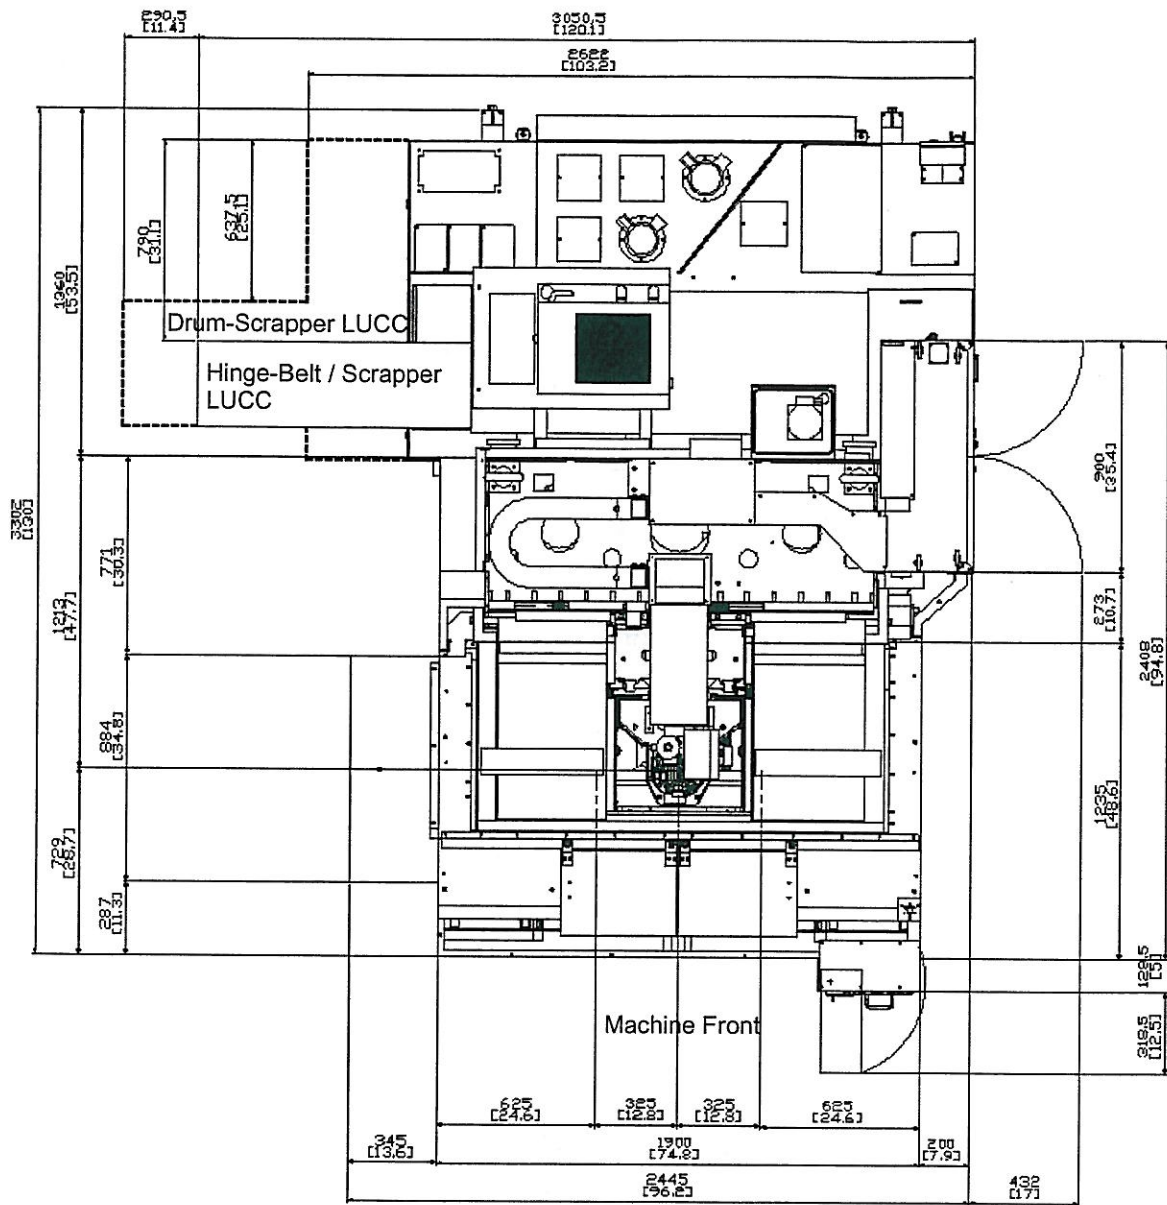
S33 Floor layout (Left LUCC without Options)
